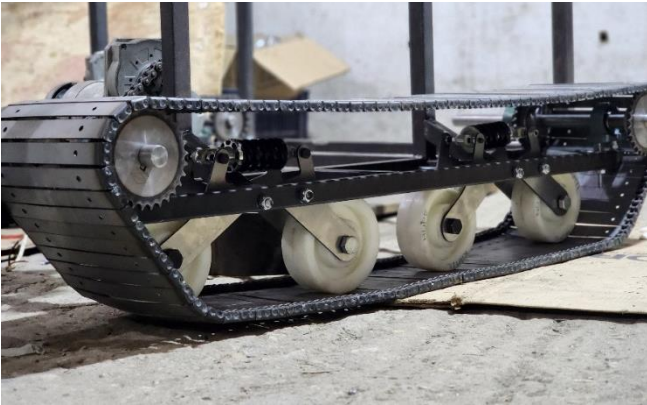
Final shape of the tracked chain after assembly on the chassis
